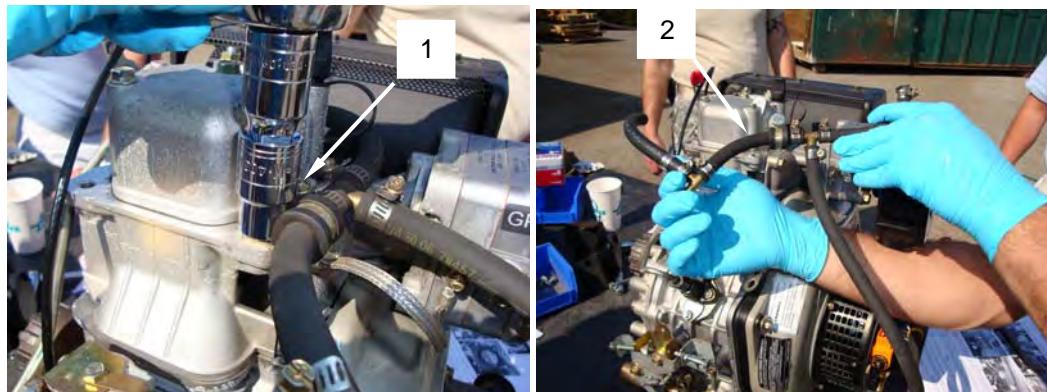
Remove Fuel Hose from Fuel Injector Pump.
